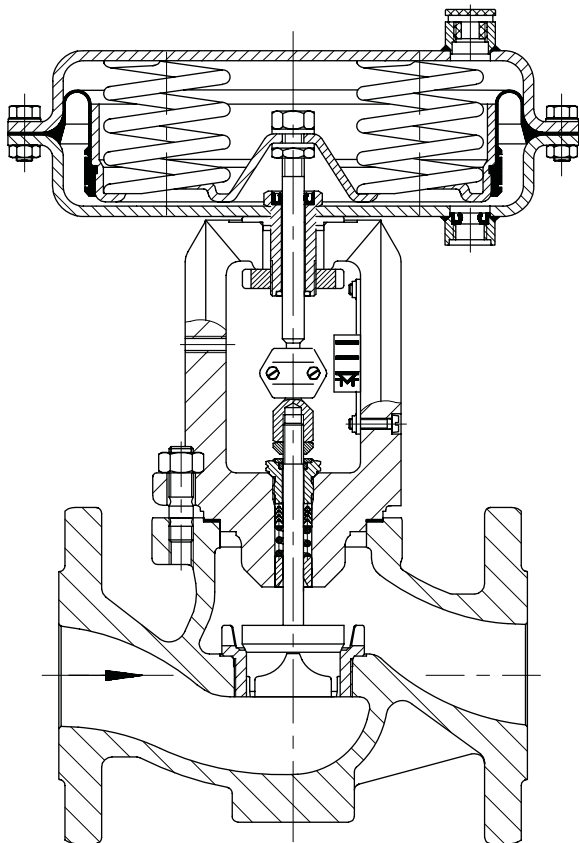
· Type 3241-1 Control Valve 1/2" to 6" and Type 3271 Actuator
